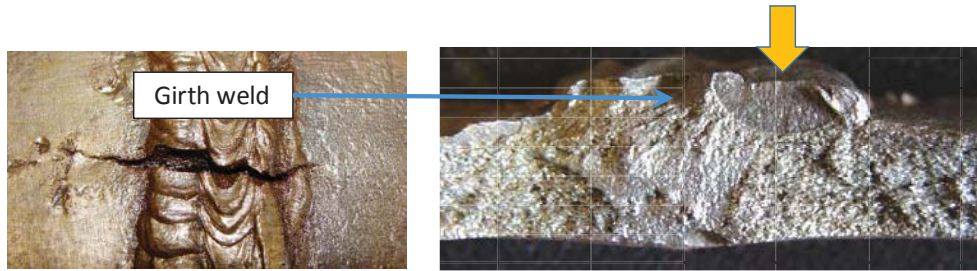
Details of leak at the outer pipe wall and fatigue crack which initiated leak by pop-through
